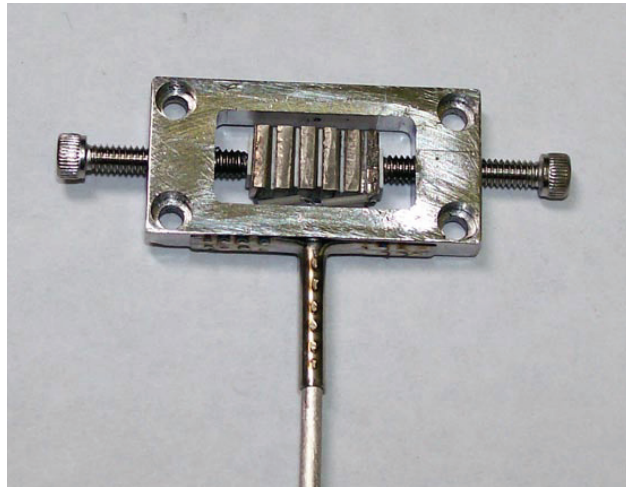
Sensor assembly after lead wire and strain relief tube spot welding.
